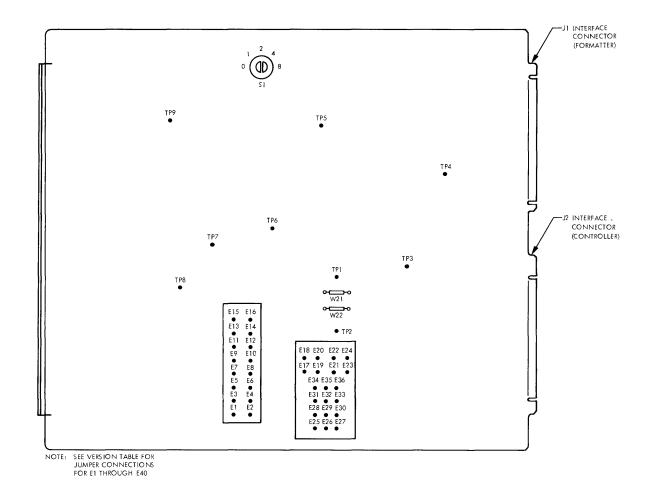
Buffer PCBA, Test Point and Connector Placement
